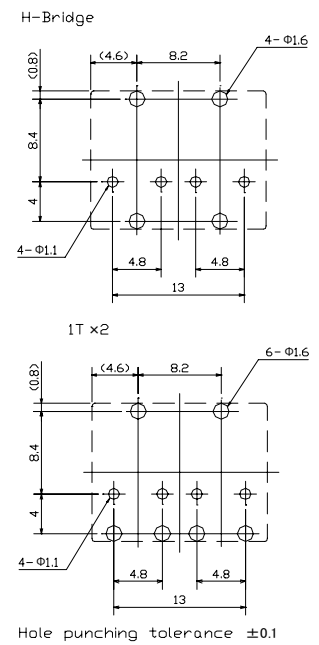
PCB pin layout (Reference figure) (BOTTOM VIEW)
